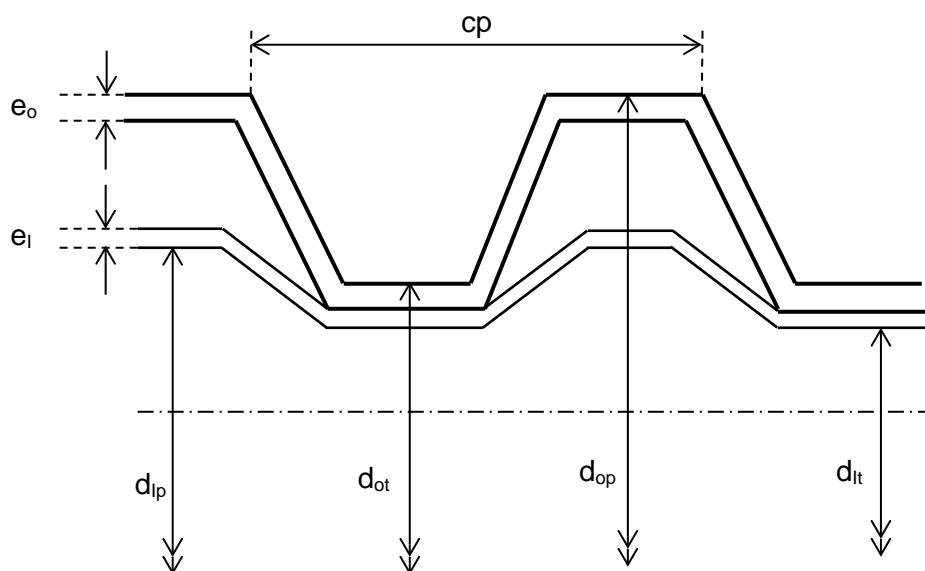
Schematic Section through Flexible Pipe - Critical Dimensions
